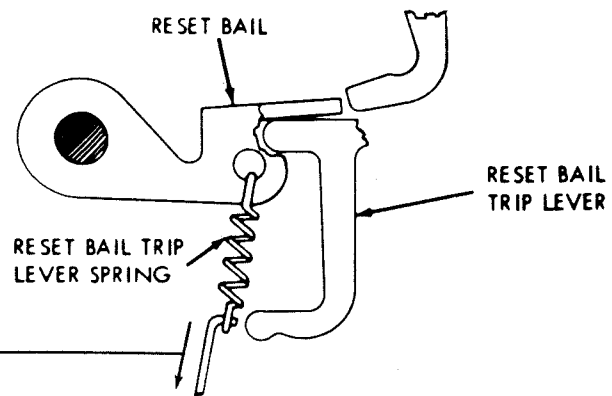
L. TYPING REPERFORATOR TT-375/UG, REMOTE CONTROL
